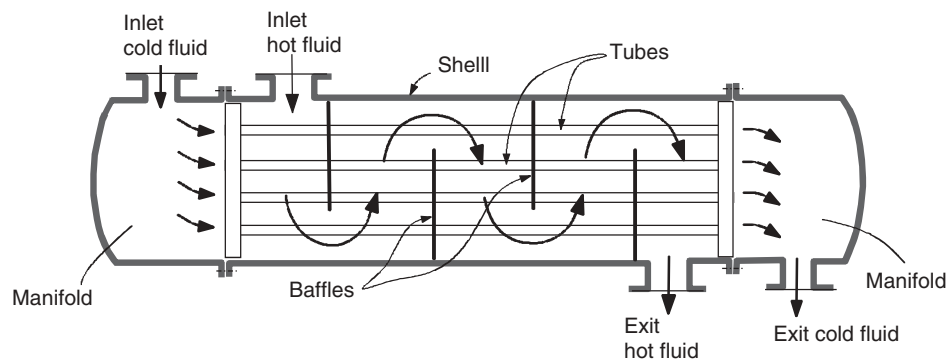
Principle sketch of a shell-and-tube heat exchanger. One shell pass and one tube pass.
